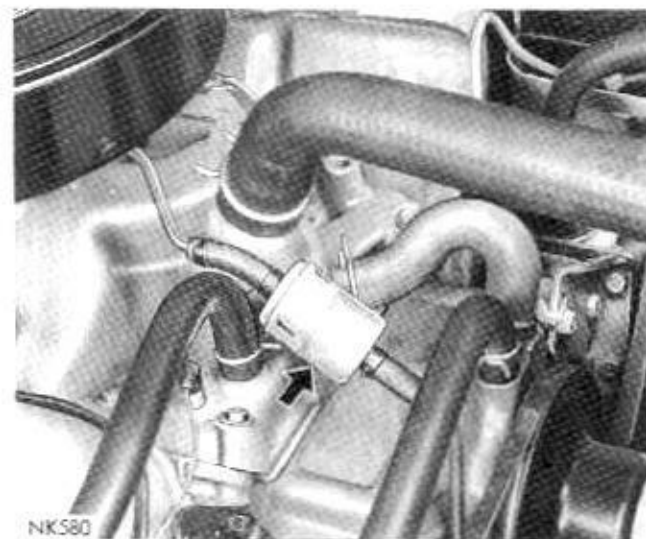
Fuel Filter (318 Cu. In. Engine)
